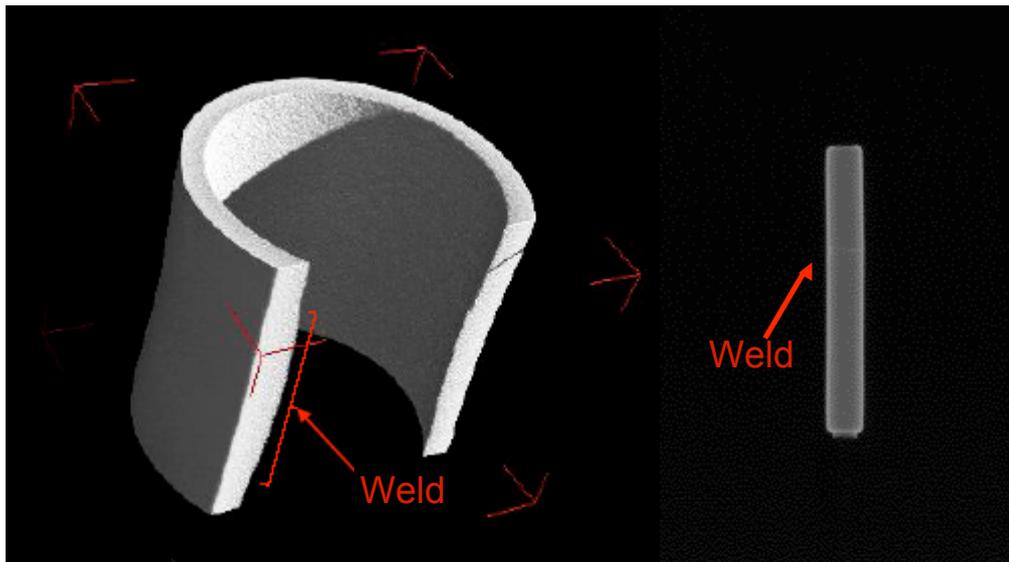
Micro-focus C.T x-ray image (left) & conventional x-ray image (right) of autogenous butt weld on 316 L Stainless Steel, illustrating the excellence of the weld.
